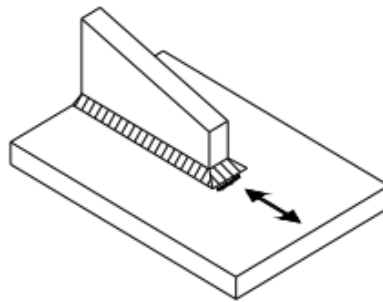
Fatigue crack growth from the weld toe into the base material (DNV-GL 2014)
